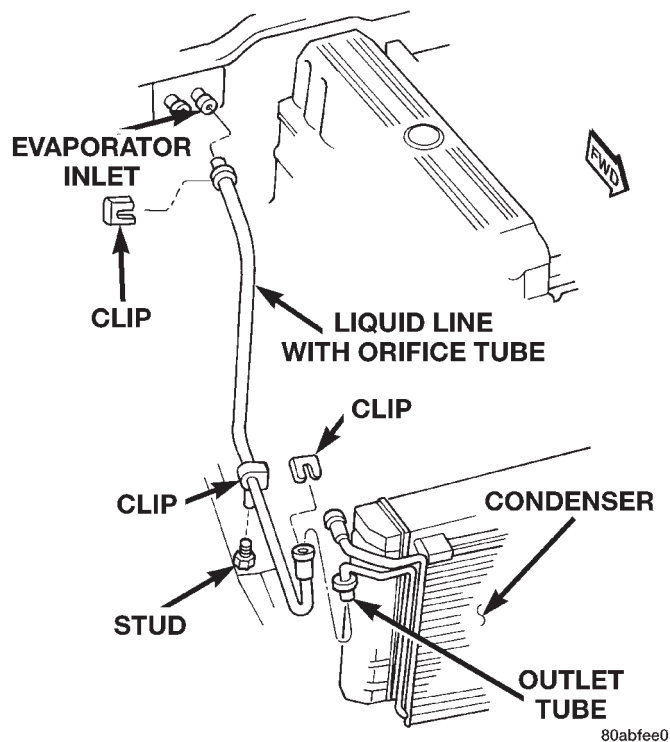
Liquid Line Remove/Install - Left-Hand Drive 4.0L Engine
